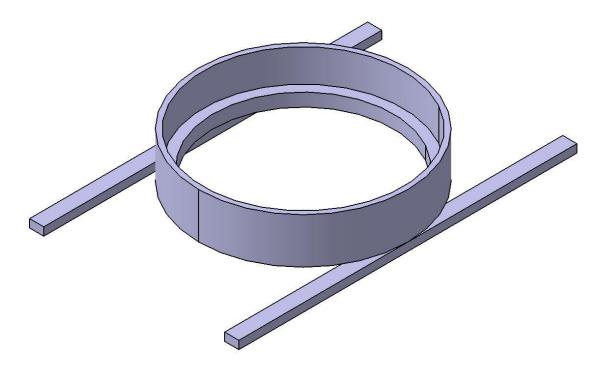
Payload system holder which will be attached to the fuselage
